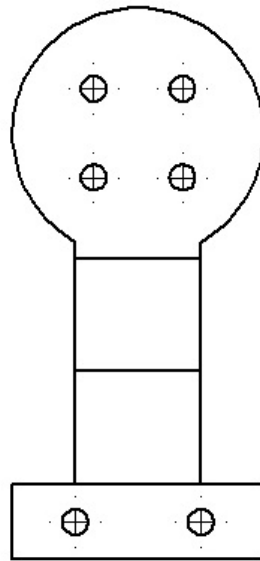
Guiding blade flexure that prevents axial rotation of the shaft.
